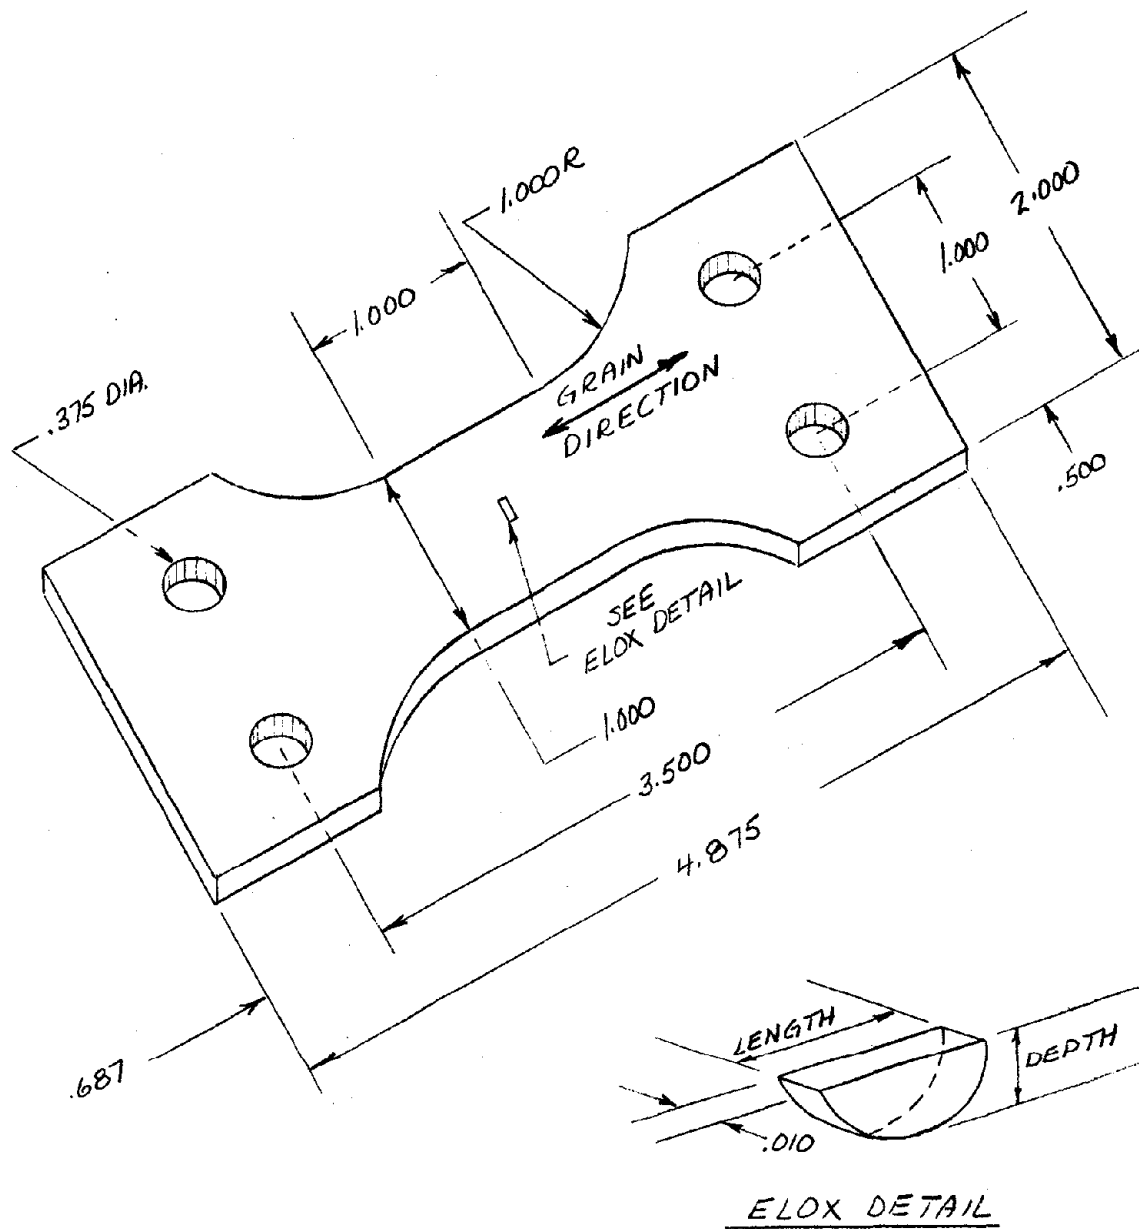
Small Specimen - 1/2 Thickness Flaw-Depth Test
